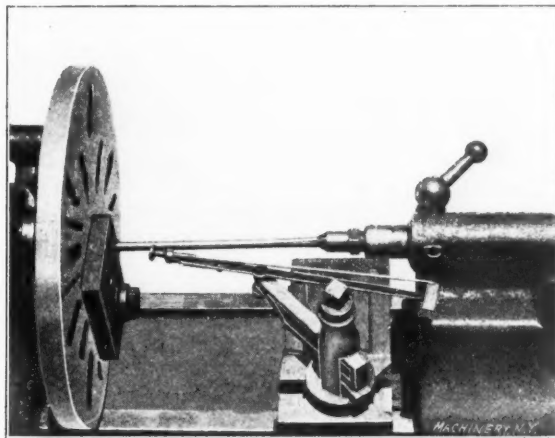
The "Just It" Lathe Test Indicator Centering a Prick-punch Mark.
